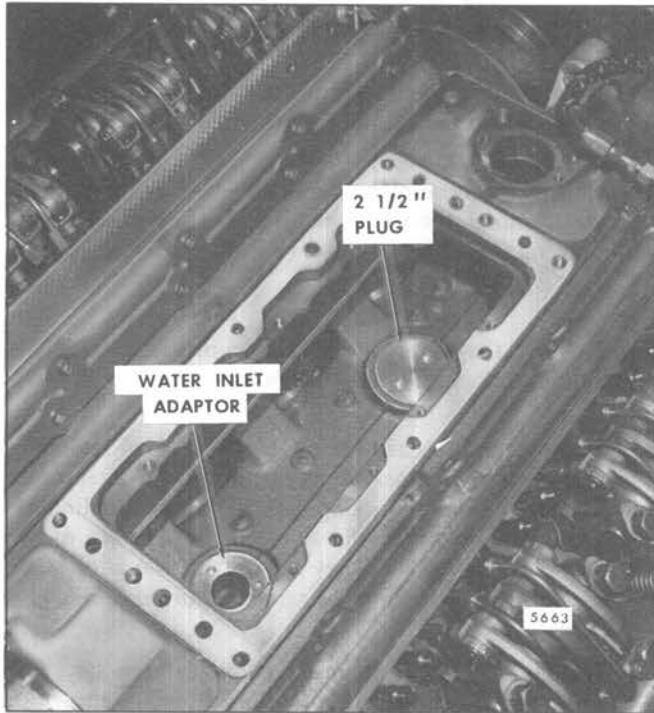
Location of Water Inlet Adaptor Plug in Cylinder Block
